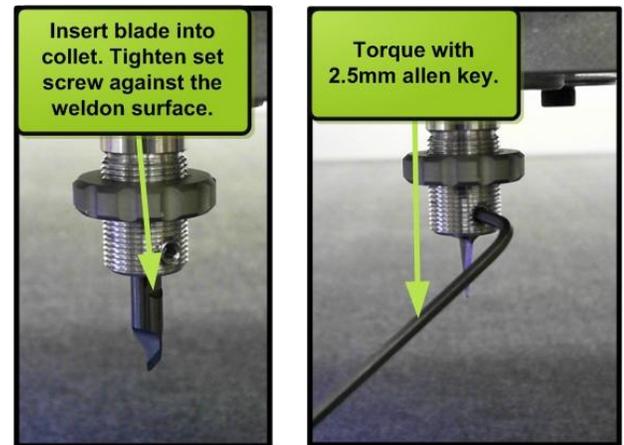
(Right) Changing a blade on the TCM-3 cutting module
